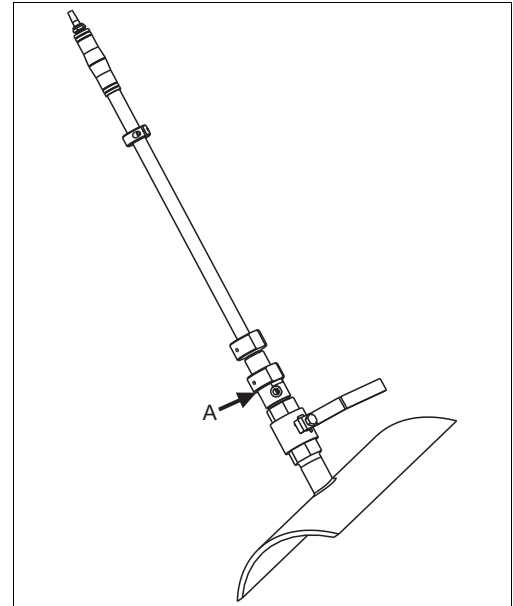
Assembly in retracted position for electrode replacement, calibration, rinsing (ball valve closed)
